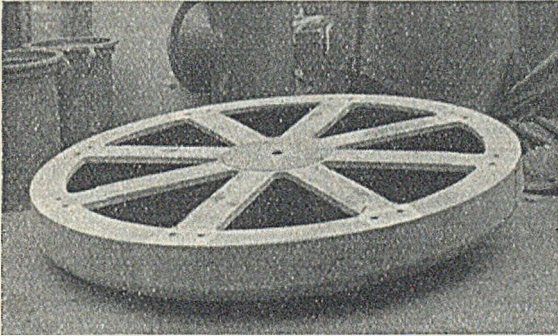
FINISHED CASTING FOR THE PLATE-FORMING DIE.
